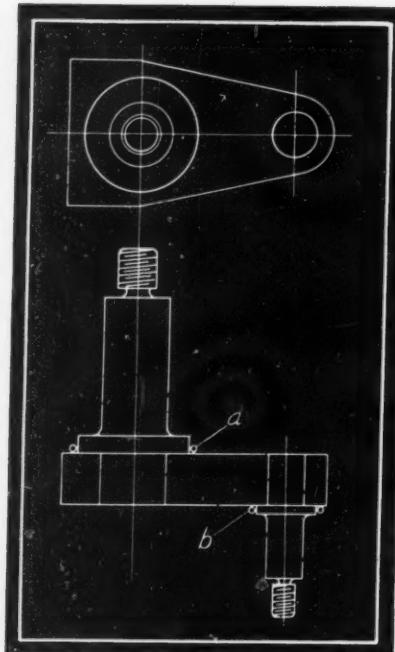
Method of brazing crank assembly. Both *a* and *b* indicate brazing wires
